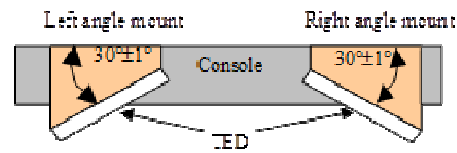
Top View of RADAR Operator Position TED Angle Mounts
